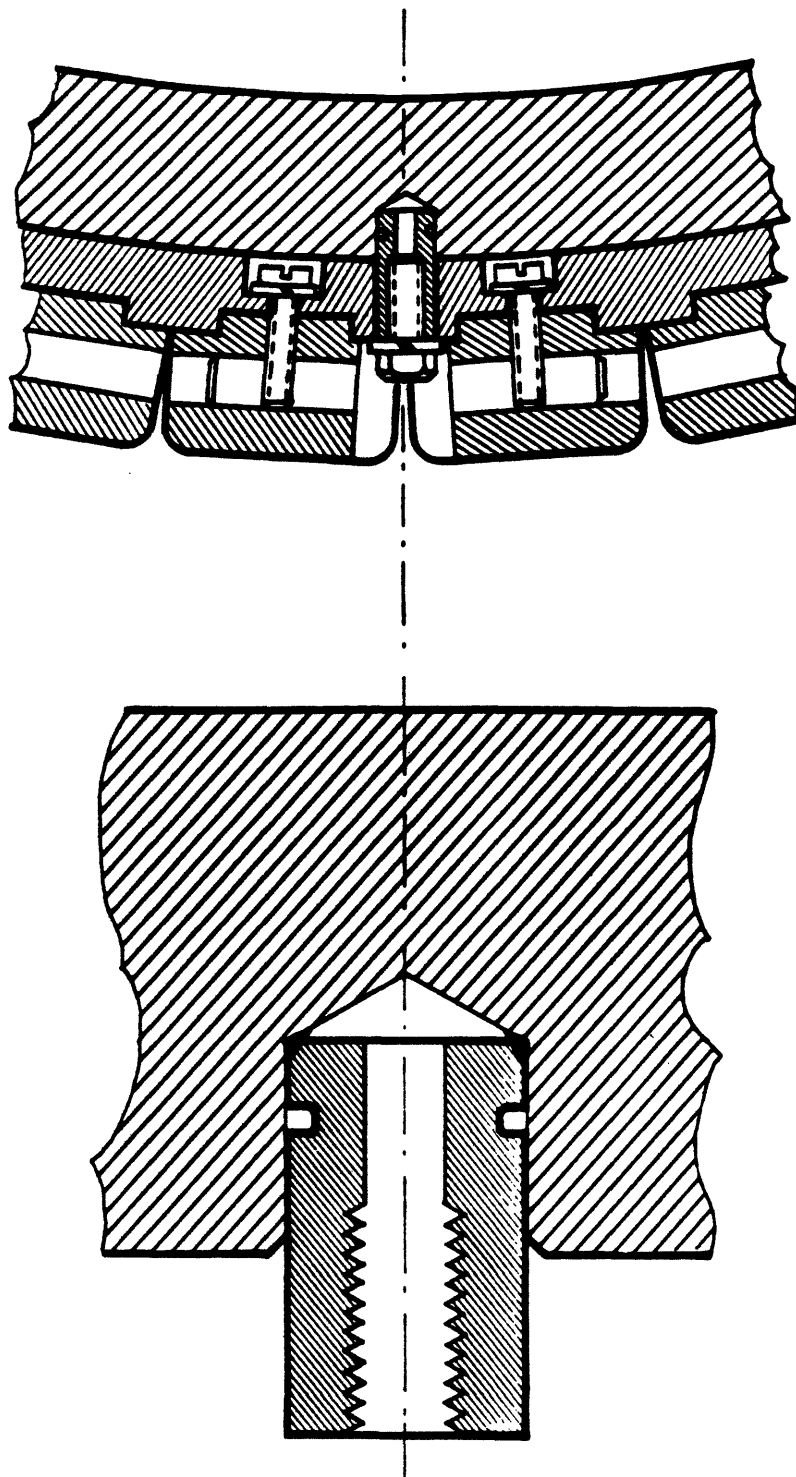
Example of tile attachment method: upper figure shows Molybdenum tile mechanically attached to stainless steel spine. Spine is attached to wall by bolting to a threaded rivet which is welded to vessel wall (bottom figure - exploded view).
